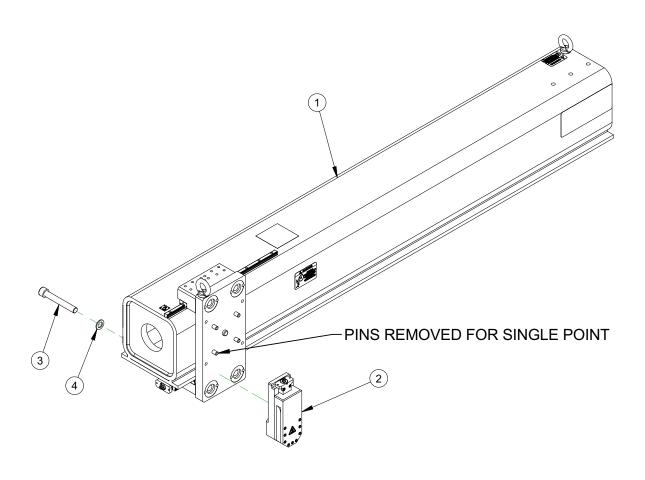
SWIVEL PLATE AND COUNTERWEIGHT ADAPTER ASSEMBLY (P/N 83125)
